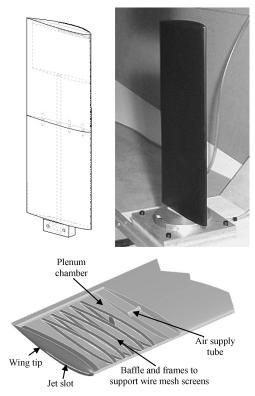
Tip-blowing wing produced on an FDM: wire-frame view of CAD model, finished model installed in the wind tunnel, and cutaway view of CAD model showing tip-blowing arrangement.
